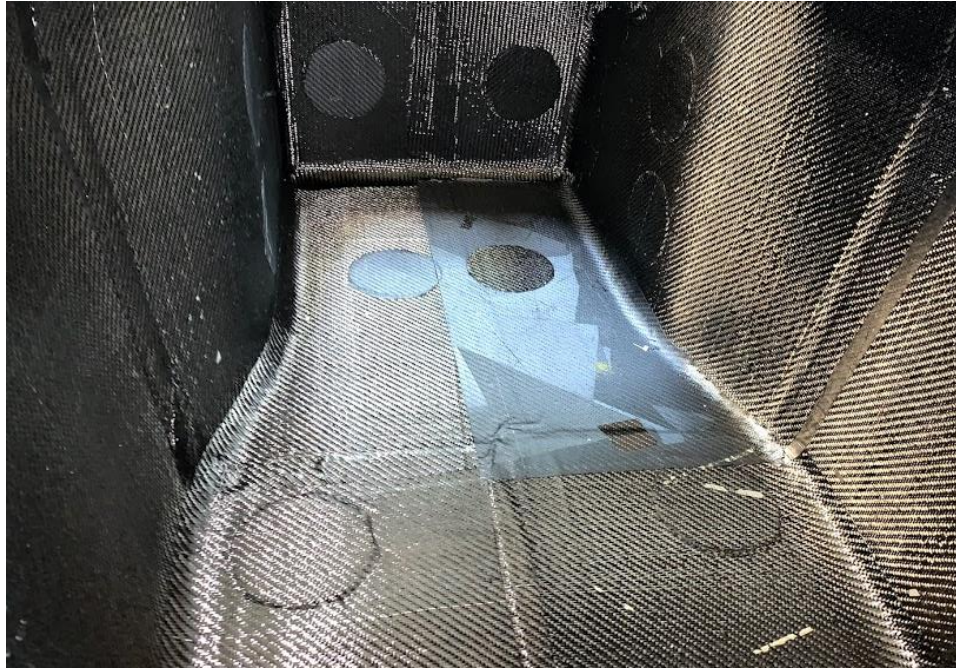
Pad-ups at suspension, engine, and harness mounts.
